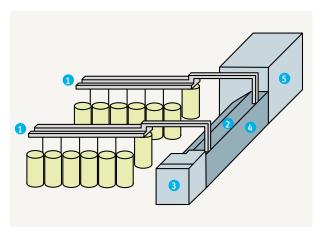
Basic design of the former Rieter UNIlap E 5/3 (lap forming machine)
